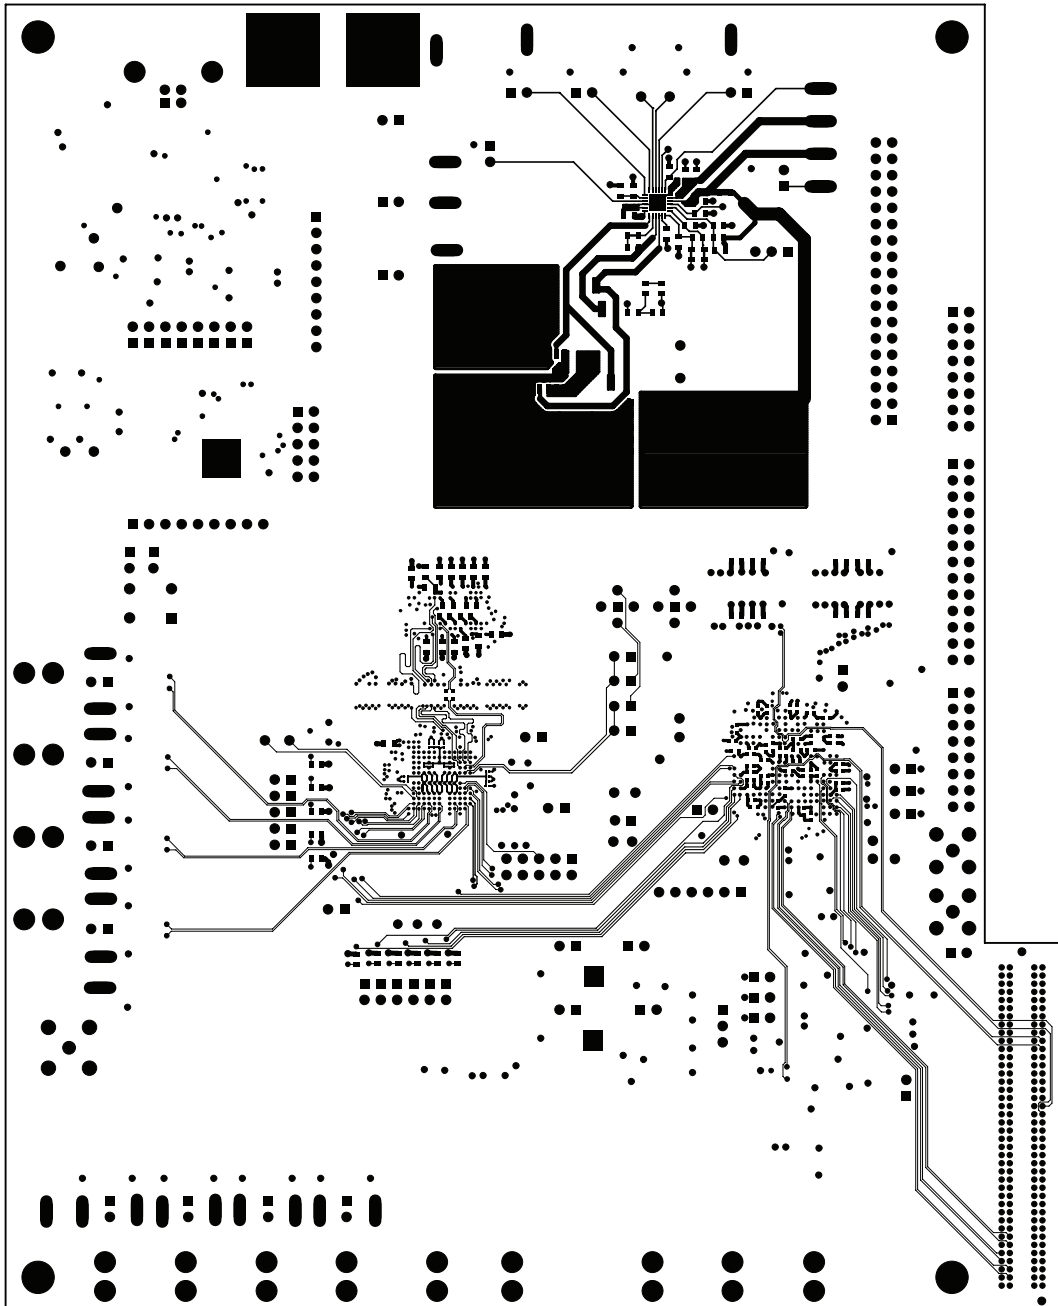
MAX9530 EV Kit PCB Layout—Component Side
